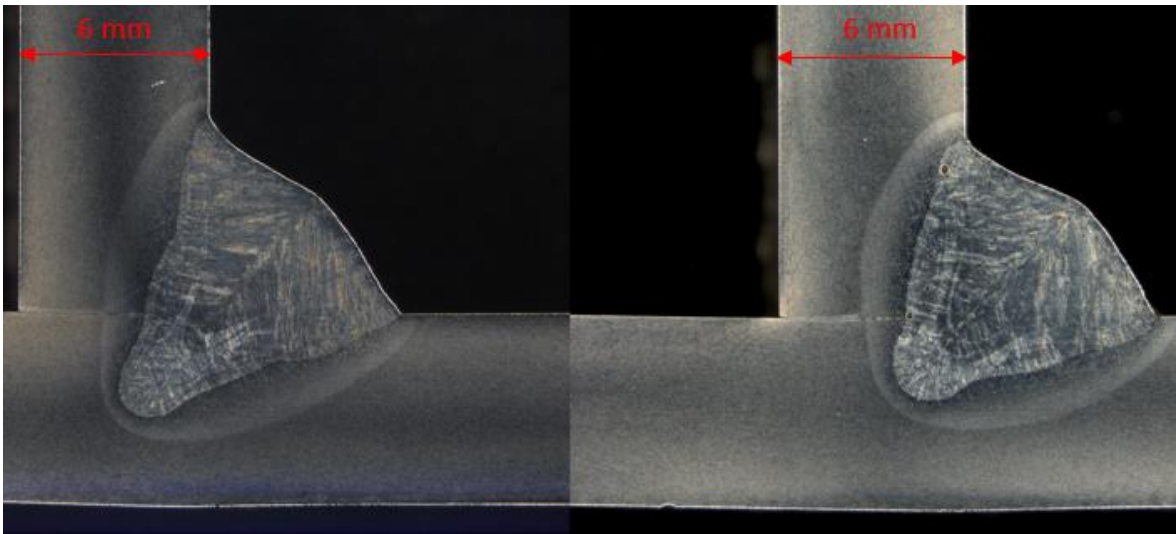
Macro images of 60A/500Hz and 150A/250Hz weld beads.
